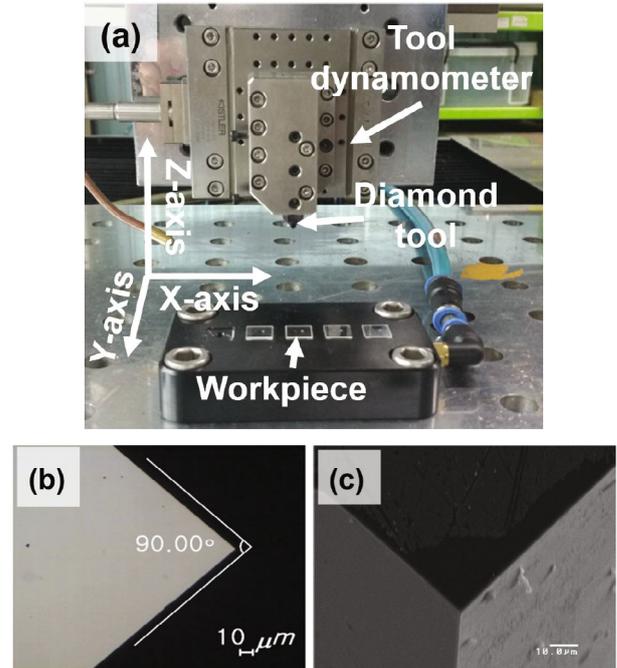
(Color online) (a) Micro pattern machining system, (b) 90° diamond tool and (c) SEM image of the diamond tool's tip.
